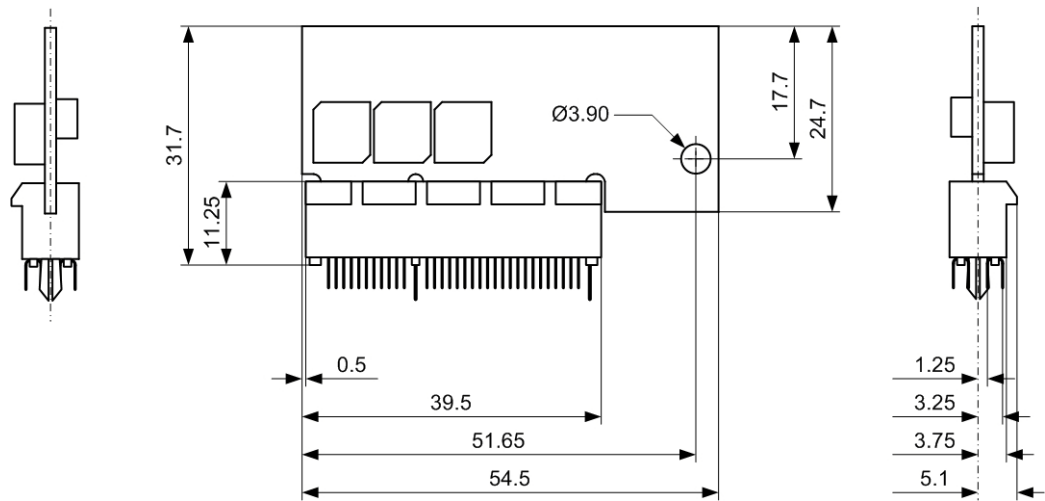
Dimensional Drawing (with vertical Connector) [mm]
